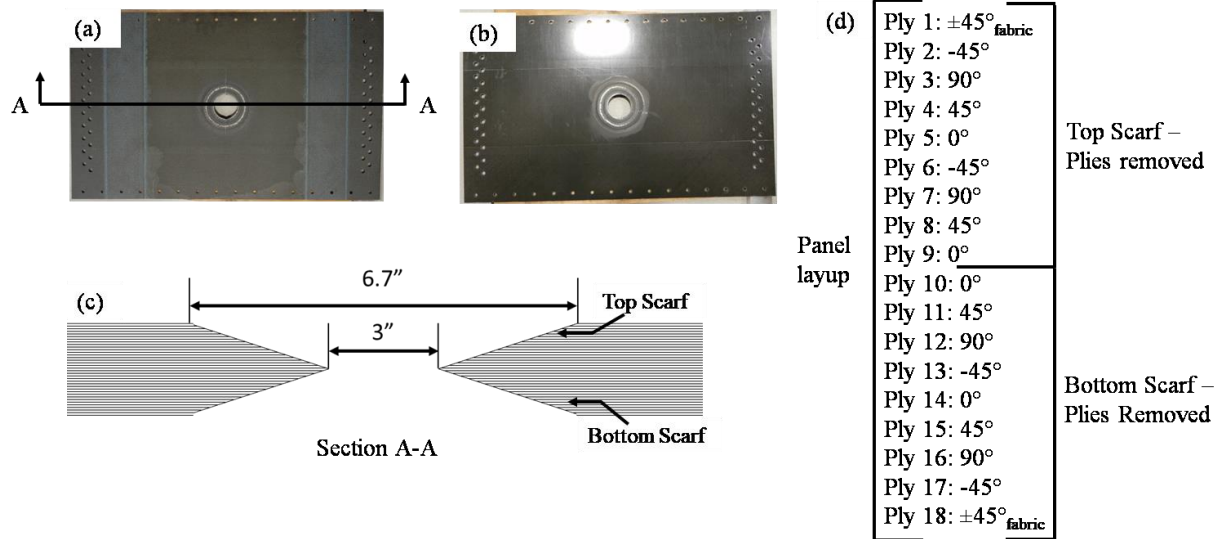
Panels 7 & 8 (a) top view, (b) bottom view (c) section A-A, (d) panel and scarf layups
